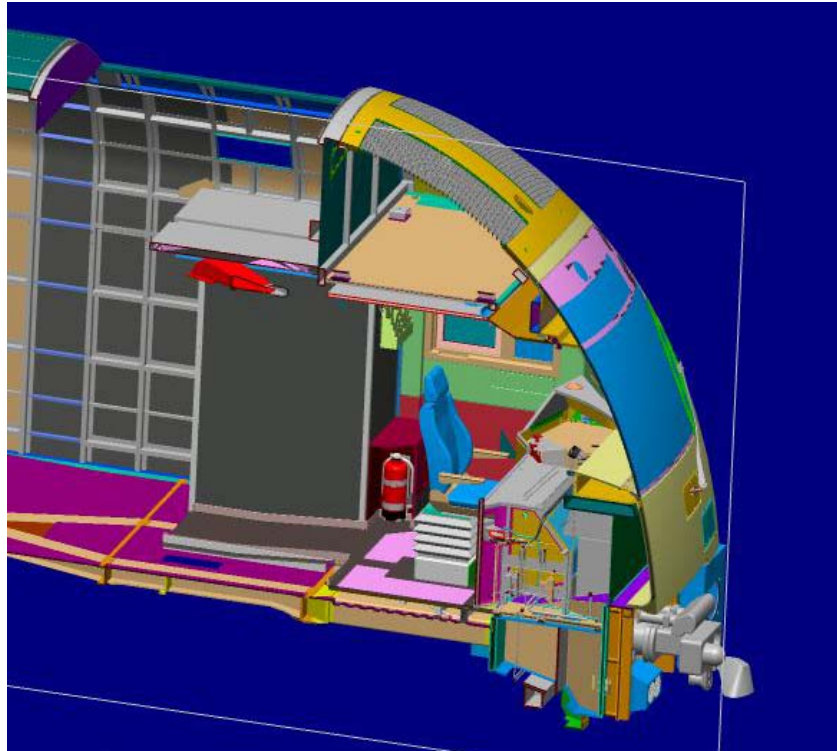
Cab Showing Crush Zone in front of Operator's Seat (Courtesy Siemens)
